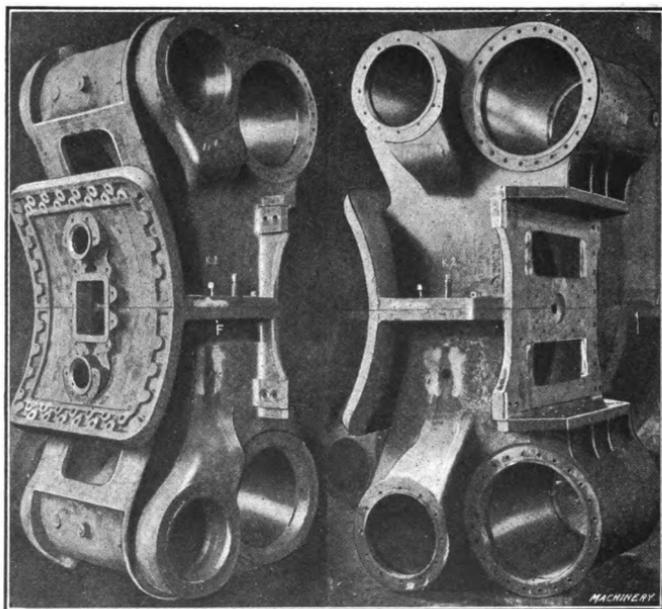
Cylinders aligned for Reaming Flange Bolt Holes
